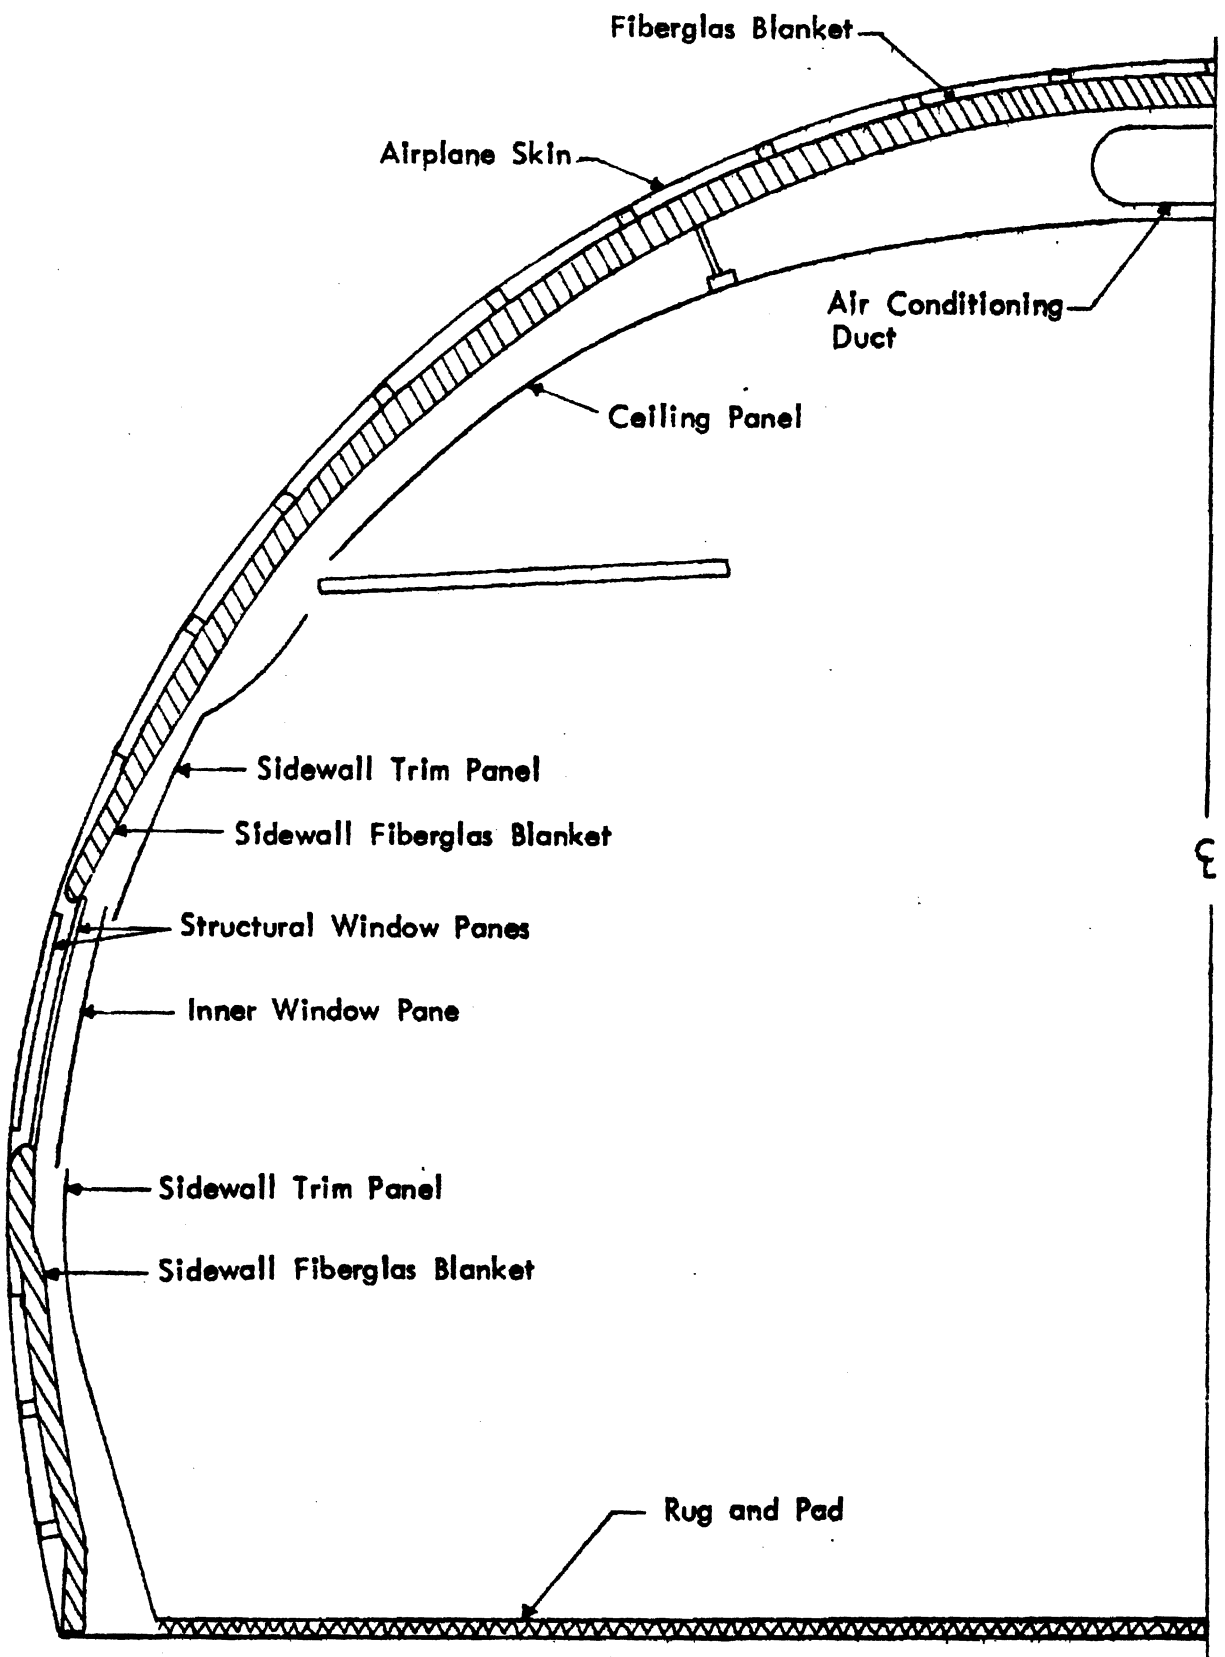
TYPICAL AIRPLANE SIDEWALL CONSTRUCTION
